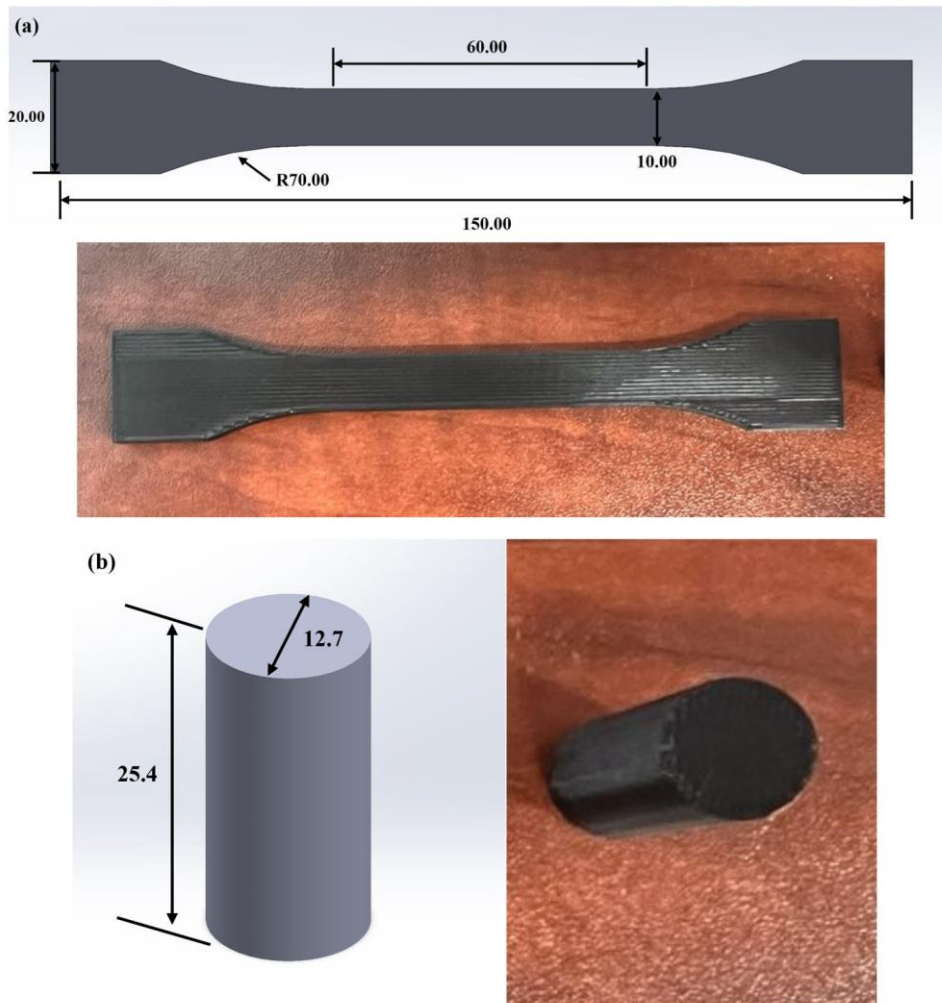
Schematic: (a) tensile test specimen and (b) compression test specimen. Dimensions are indicated on the figure in millimeters (mm)
